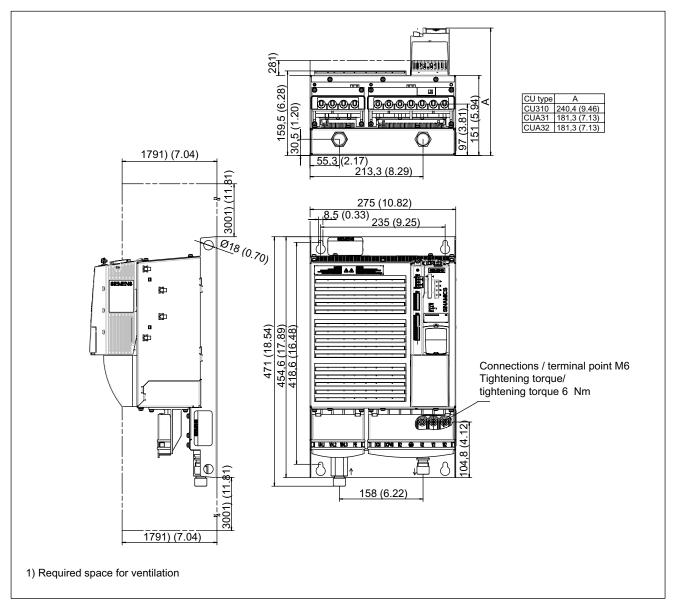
Dimension drawing: Power Module PM340, frame size FSD Liquid Cooled
